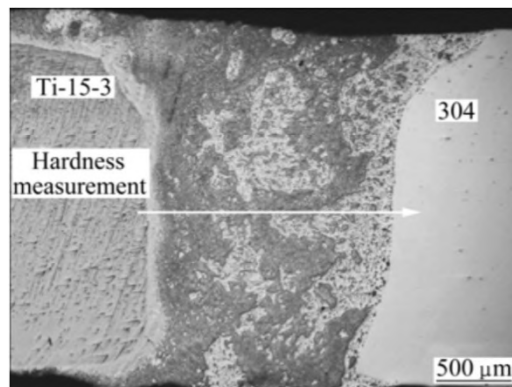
Ti to stainless steel electron beam weld bead morphology.
